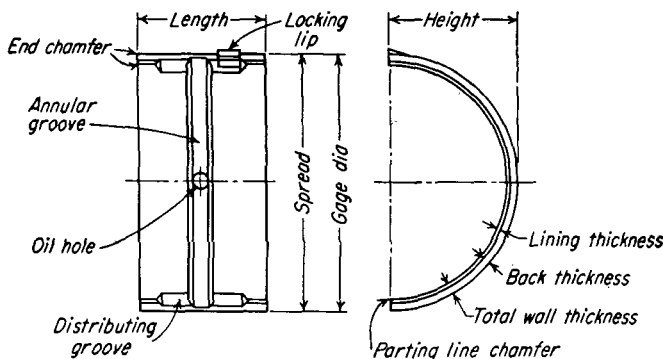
Typical bearing half with parts named. Note oil grooves. (*Federal-Mogul Corporation*)
